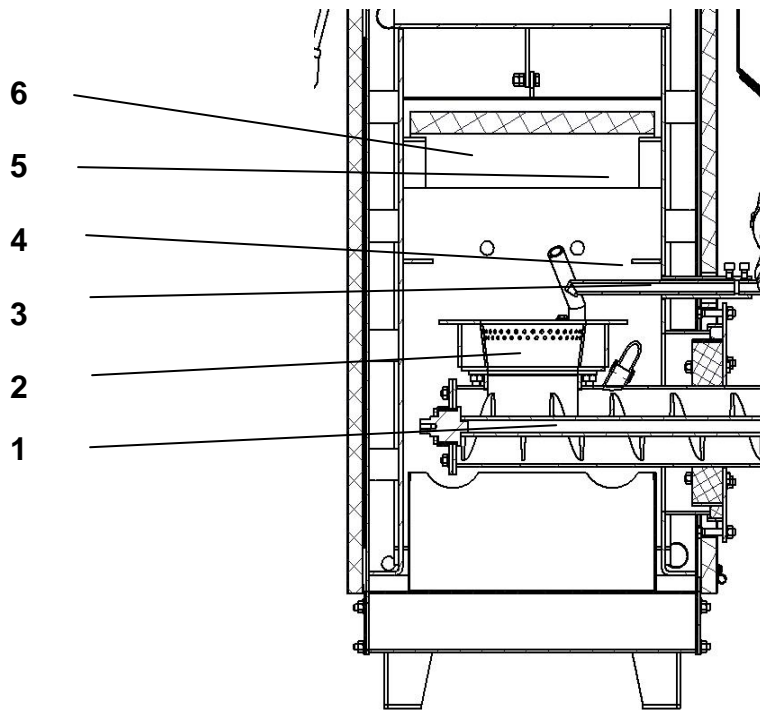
Sectional view at the combusting chamber of the pellets boiler
